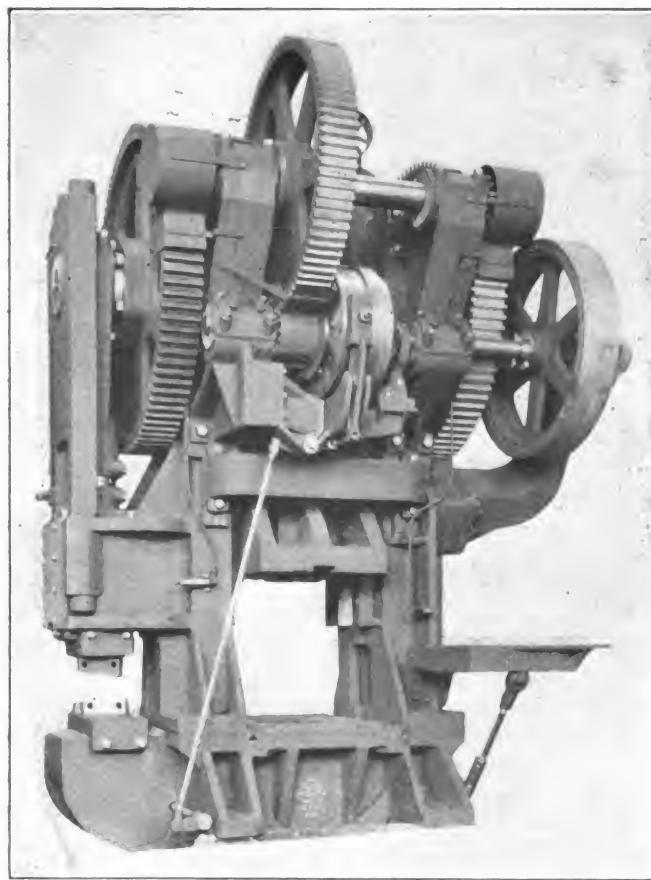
Rear view of gigantic Toledo trimming press, largest single crank press ever built, having weight of 185,000 lbs. and capacity for work from hammers as large as 15,000 lbs.
